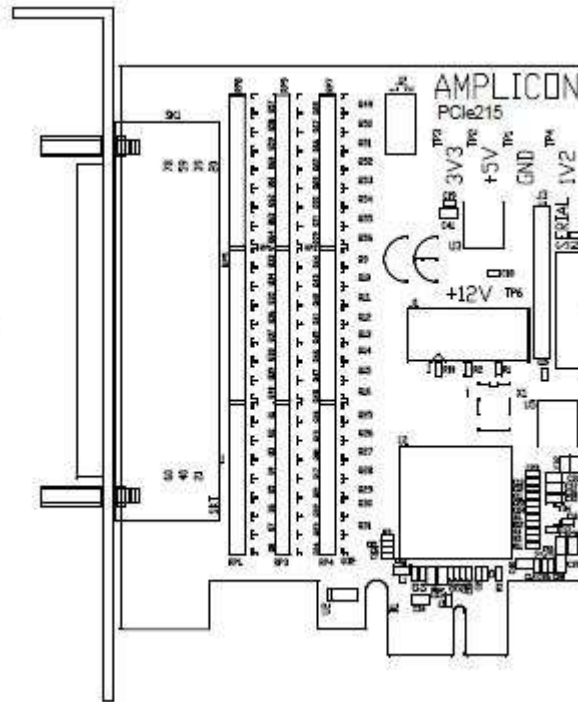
PCIE215 PRINTED CIRCUIT ASSEMBLY
